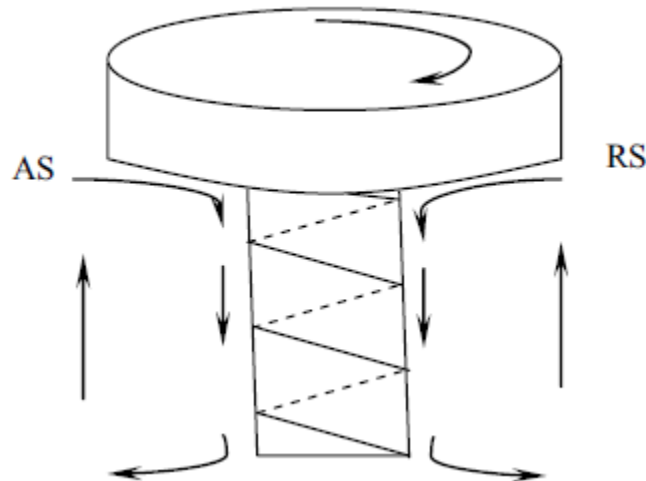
Material Flow of a Left-Hand Thread Pin Tool [24]
